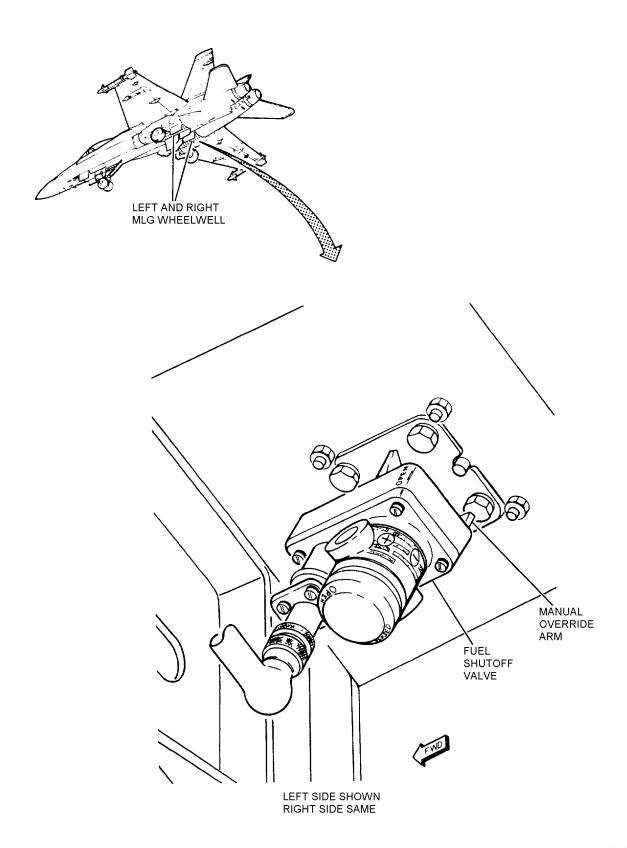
Engine Fuel Shutoff Valve Leak Test (Sheet 2)
